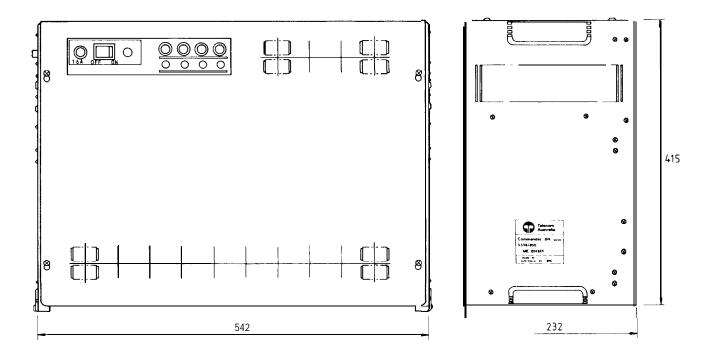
(a) BN-824 MAIN EQUIPMENT CABINET DIMENSIONS
